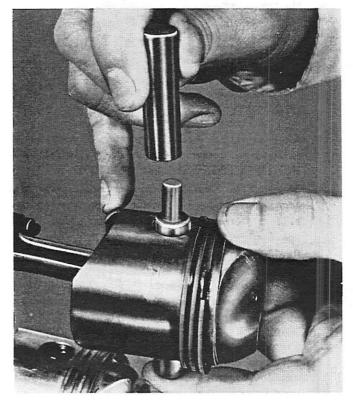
Inserting Piston Pin on Piston Pin Tool January 1961 Section II - Powerhead
